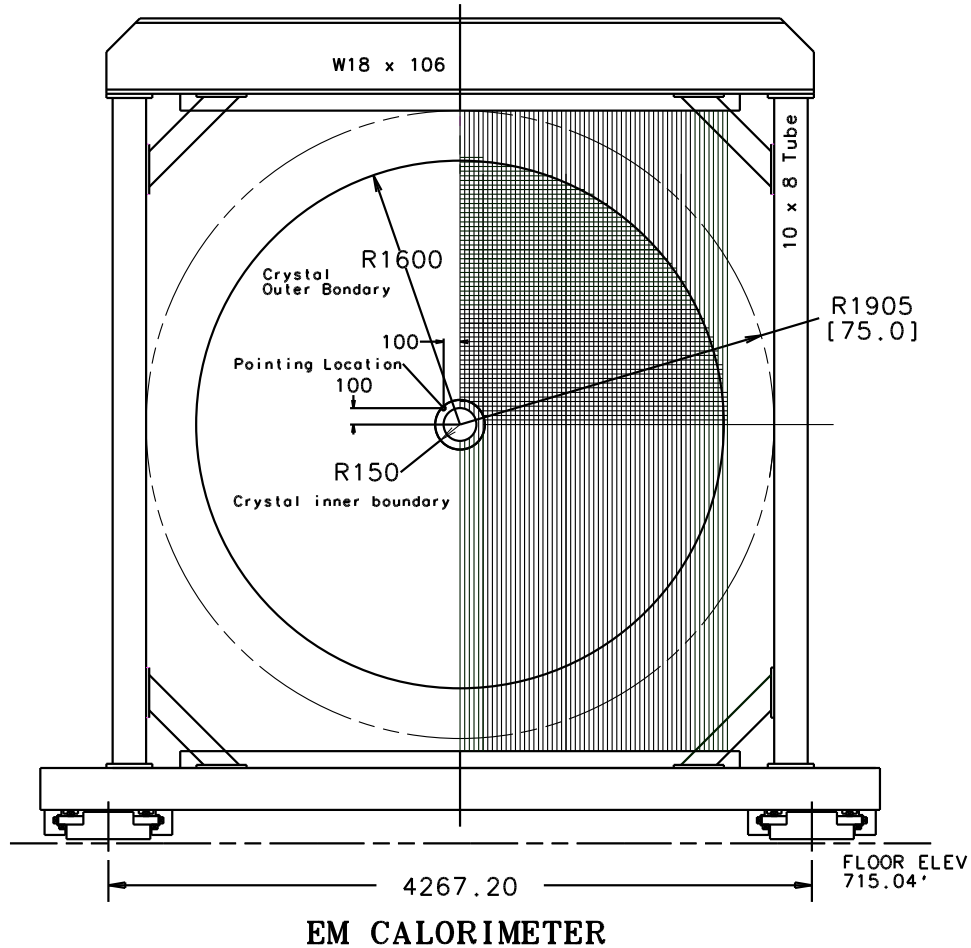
Front view of the EM calorimeter support structure. Dimensions are in mm except as indicated.
